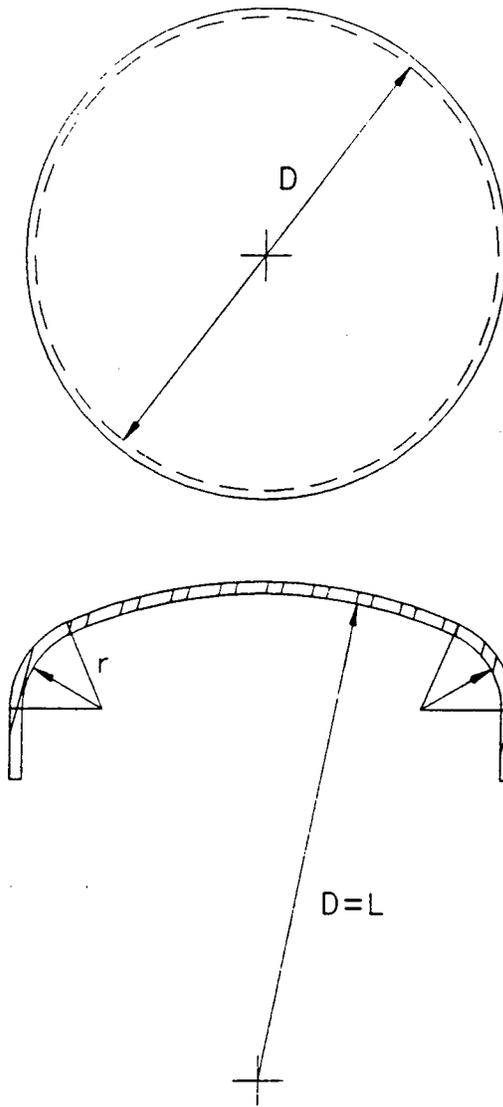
Typical ASME flanged and dished (torispherical) head used on cargo tanks.
